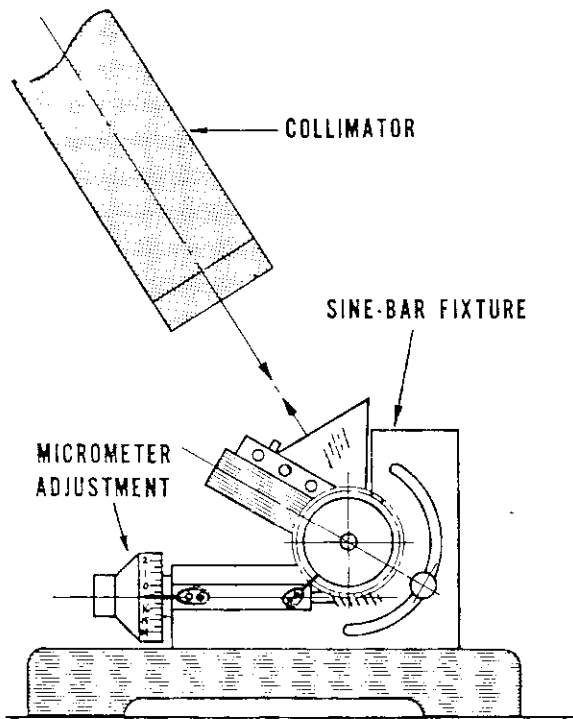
Use of auto-collimator with sine-bar fixture for checking a production run
